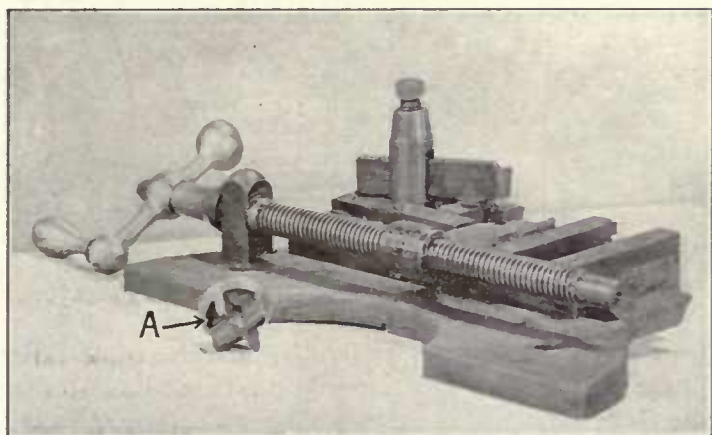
Tool for Finishing Air Pump Valves on Turret Lathe.
